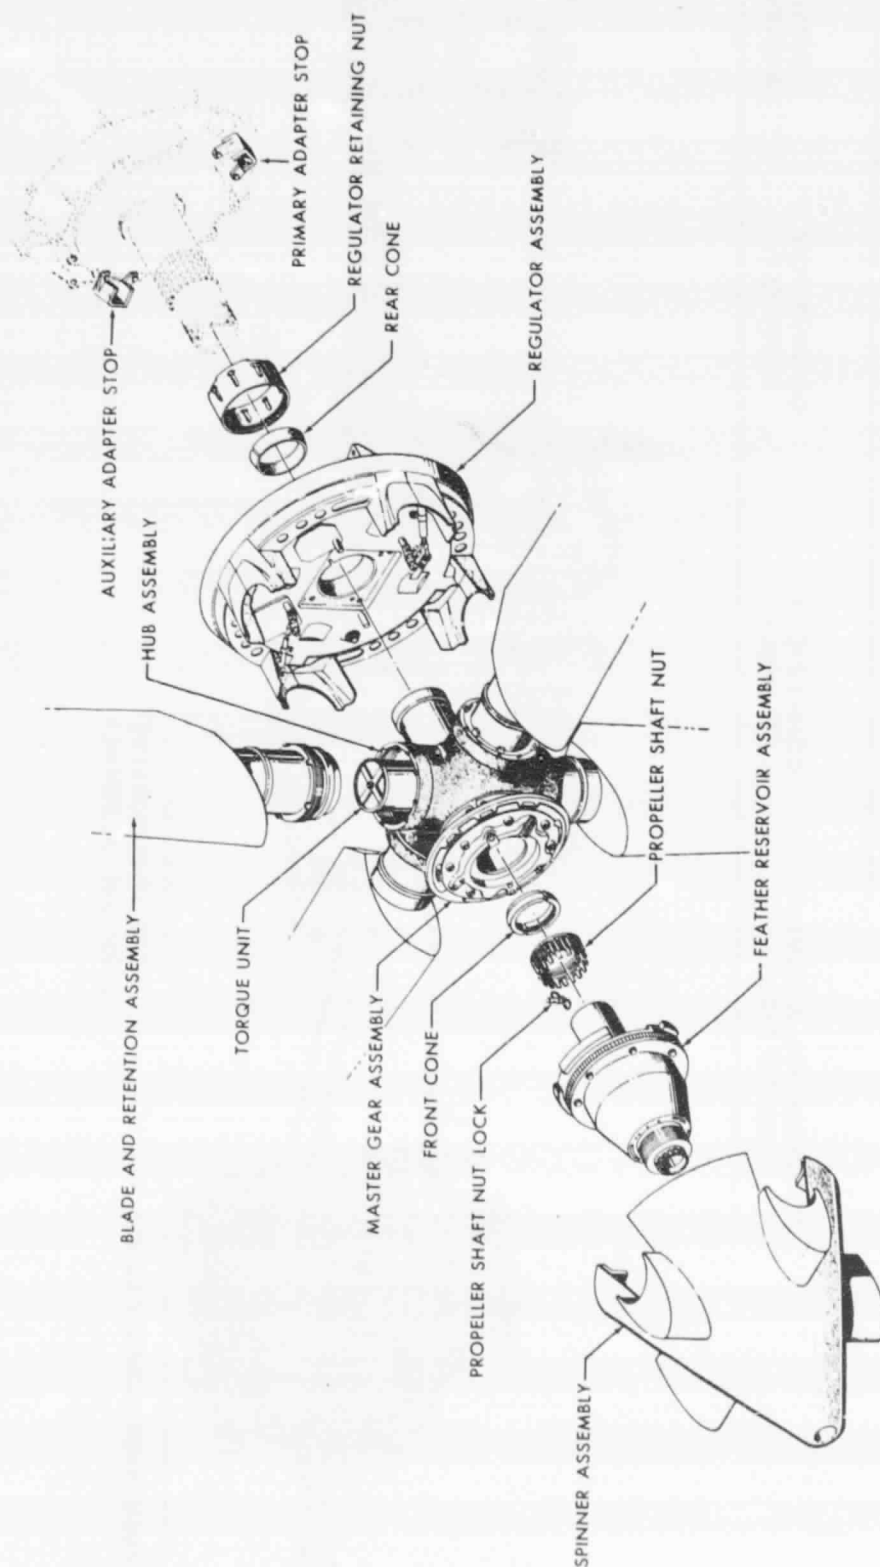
Diagrammatic assembly of Aero products 606 propeller.
